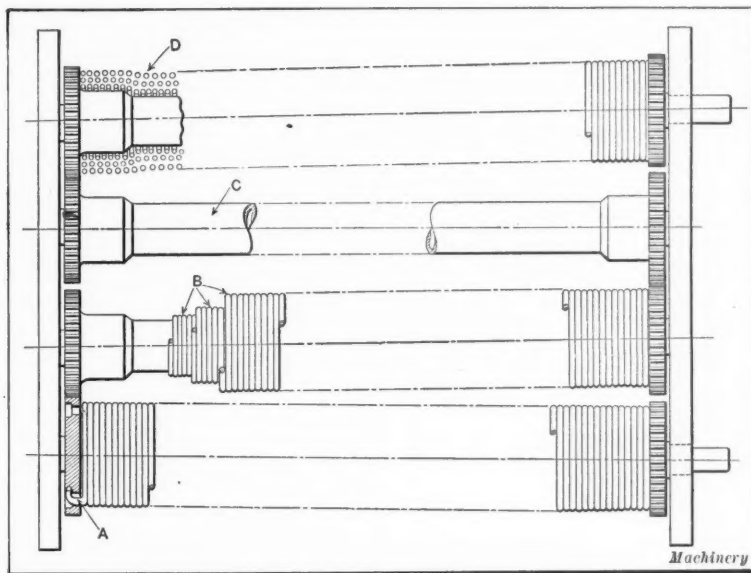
Construction of Spring Batteries and Arrangement of Geared Drive
